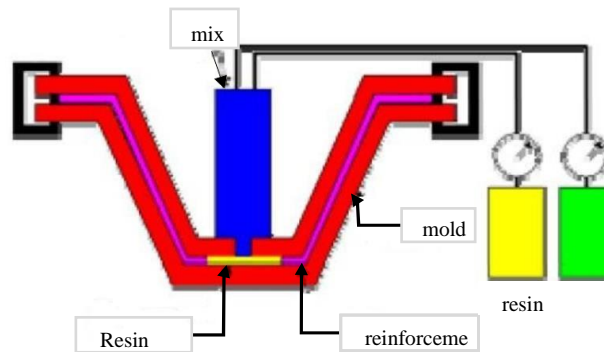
Manufacturing of composites with resin transfer molding [15]
